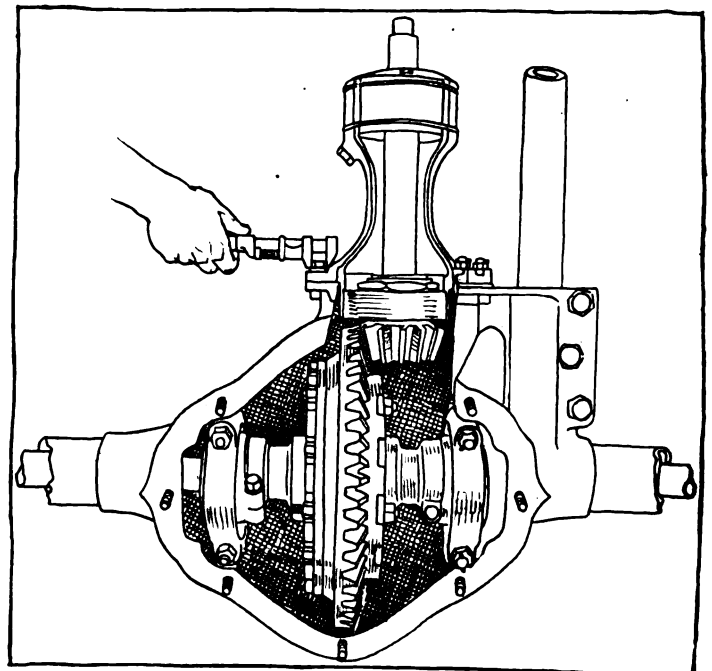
Showing bolts which have to be removed in adjusting gear mesh
